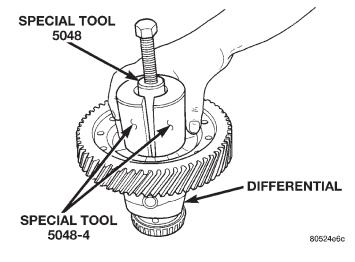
Position Tool 5048 Over Button and Collets at Differential Bearing (Ring Gear Side)
